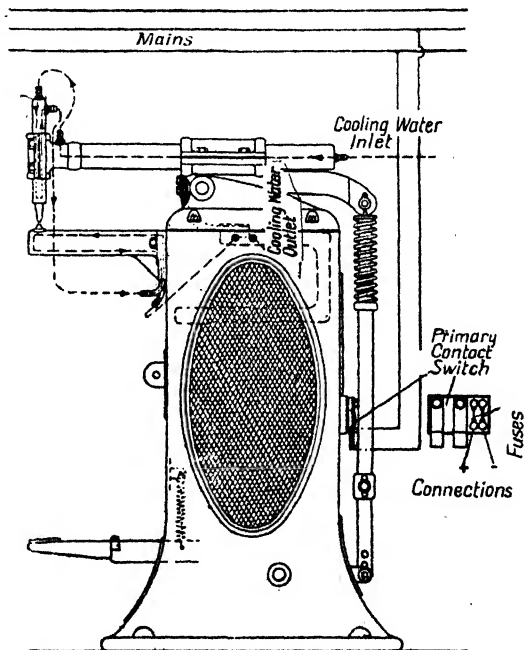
Spot-welding machine with the cooling water passage shown
